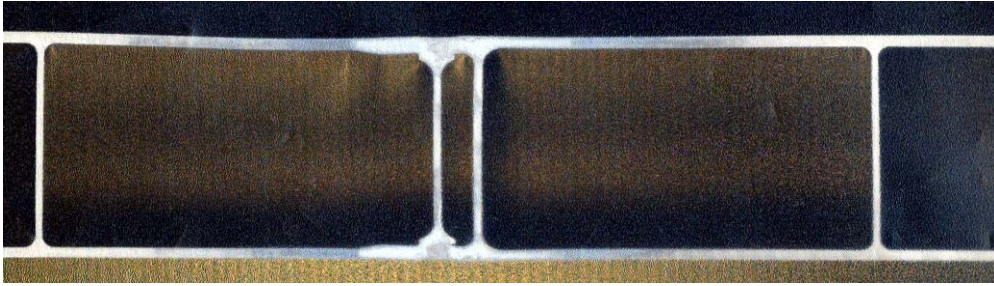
An extruded profile designed for friction stir welding. © Mäkelä Alu Oy, Finland.
